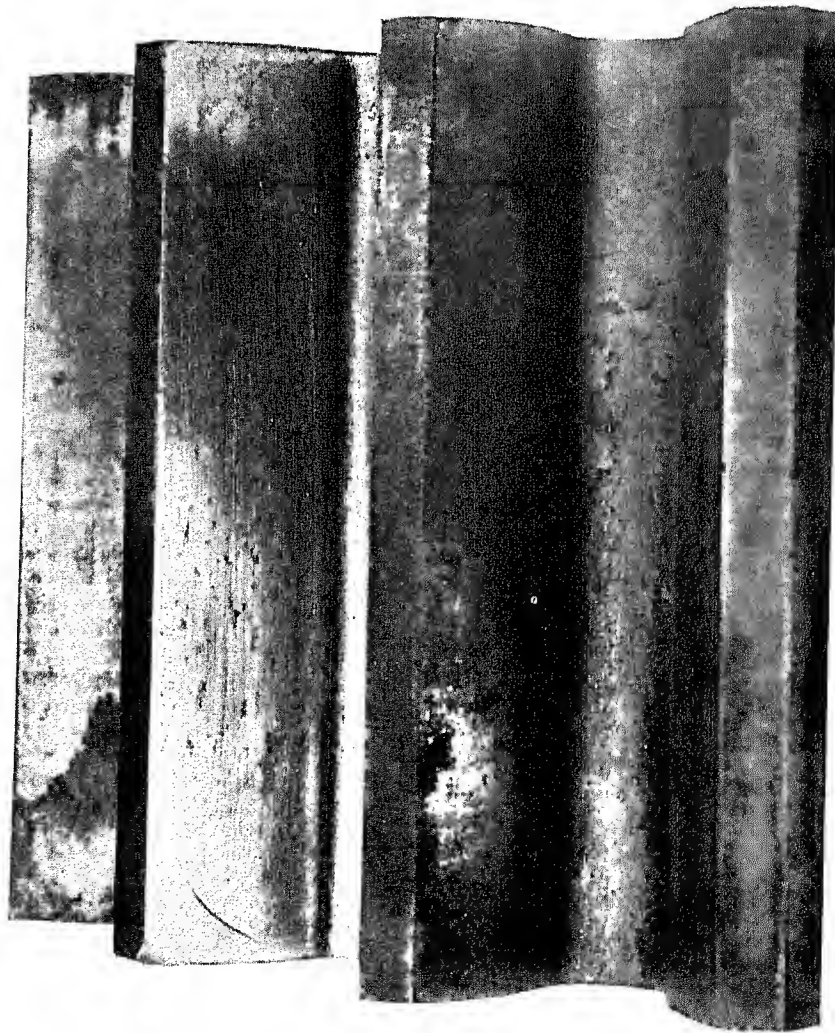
Fig. G.—Quenched pinion after magnetic test, showing hardening crack near end of tooth.
